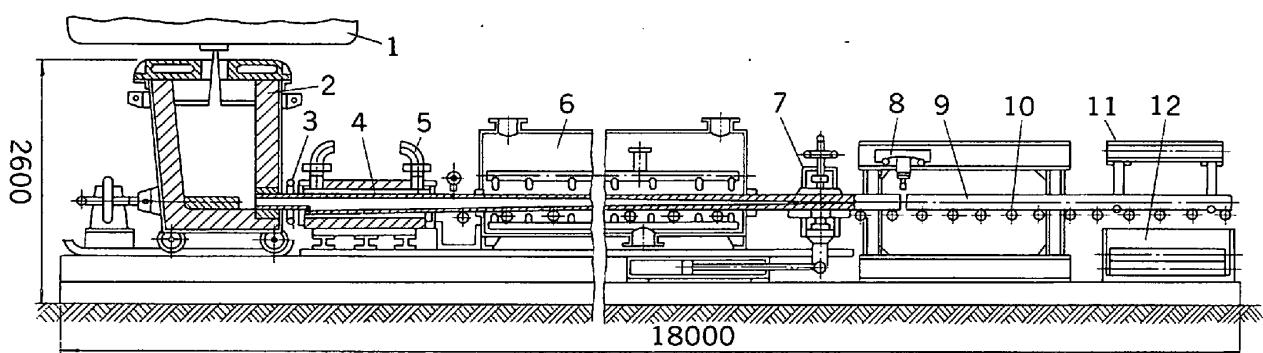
Elevation of horizontal continuous casting Machine of Sumitomo⁷⁾.
